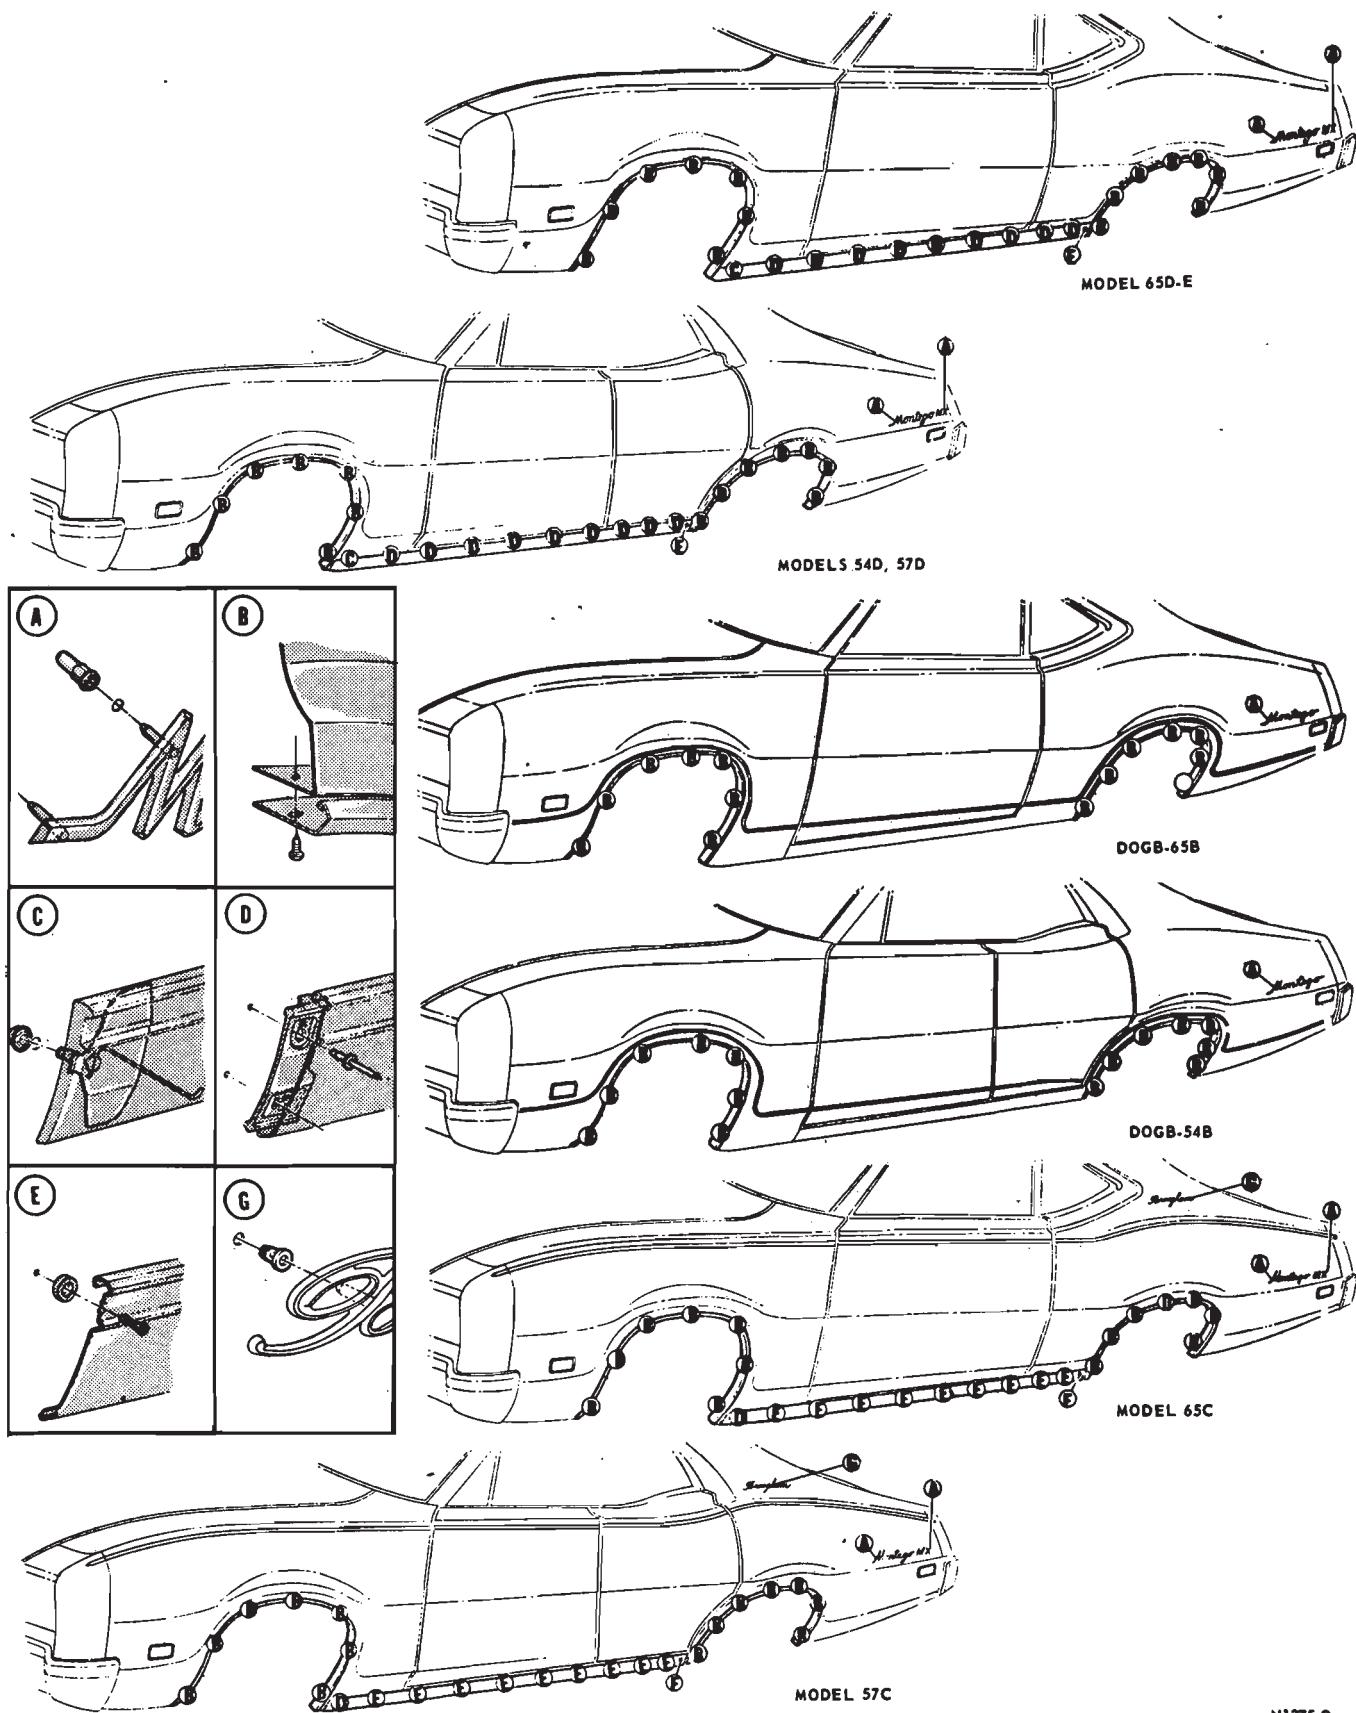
Montego Exterior Side Moulding Installation—Models 54A-B and 65A-B
